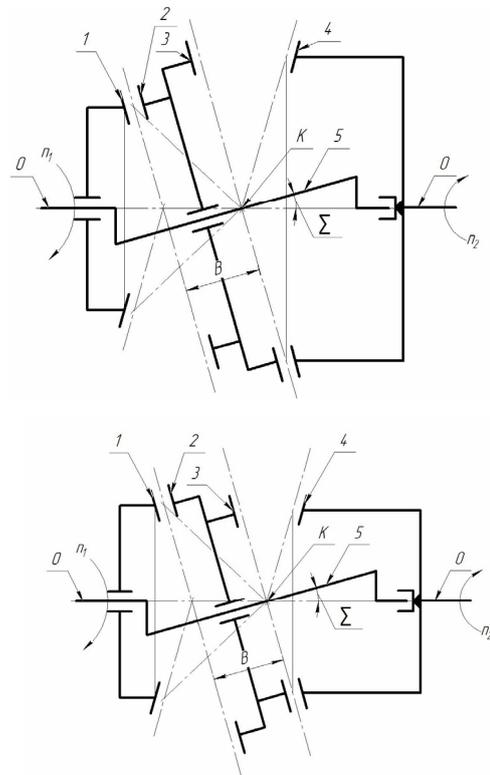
Coaxial gearbox scheme, gear coupling module is larger (a) or smaller (b) than bevel precessional gear
